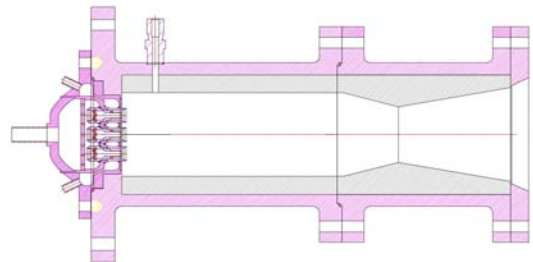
Section View of Assembled Part for Validation Combustion Test
